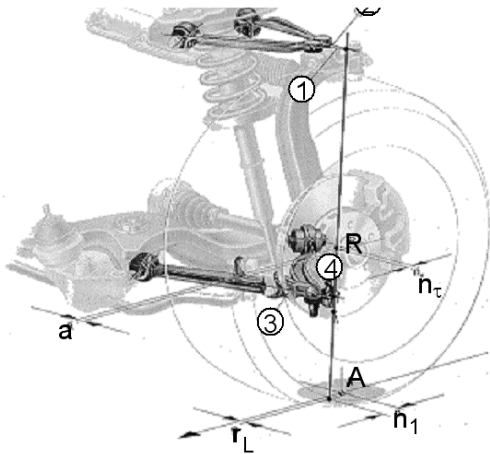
Position of the steering axle of four-link wheel suspension and McPherson front axle
